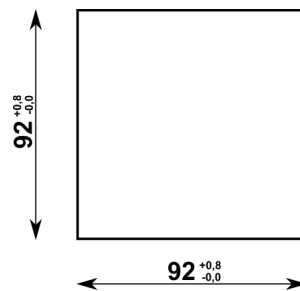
MPP®820 converter MPP mounting hole dimensions
